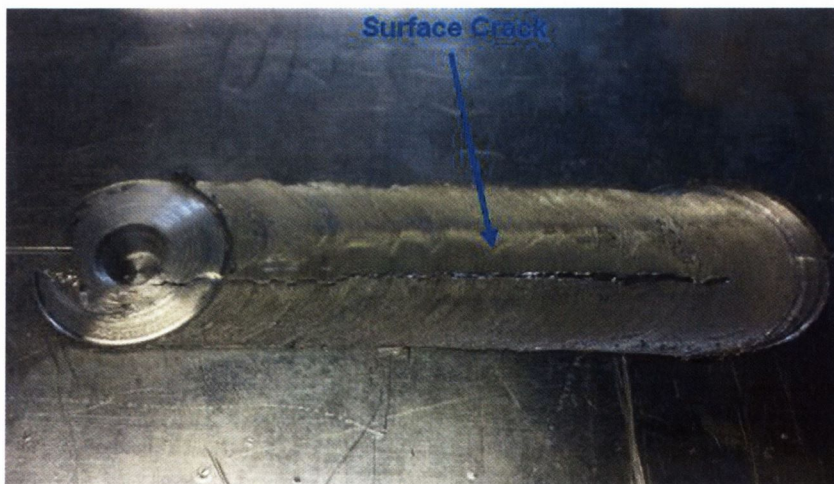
Surface defect due to an insufficient plunge depth
